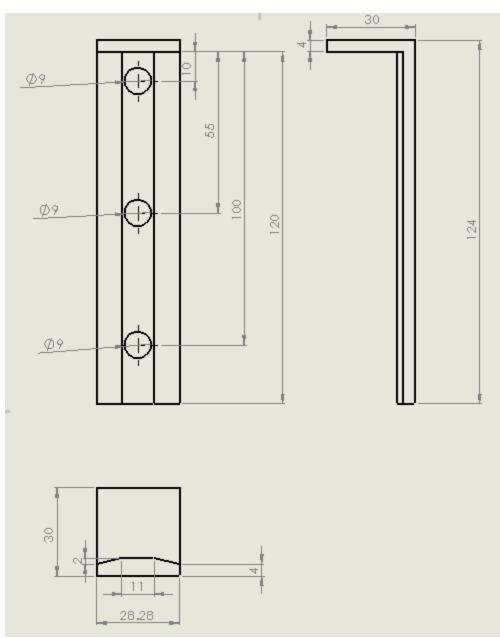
Cylinder Bore Ladder (dimensions are in mm)
